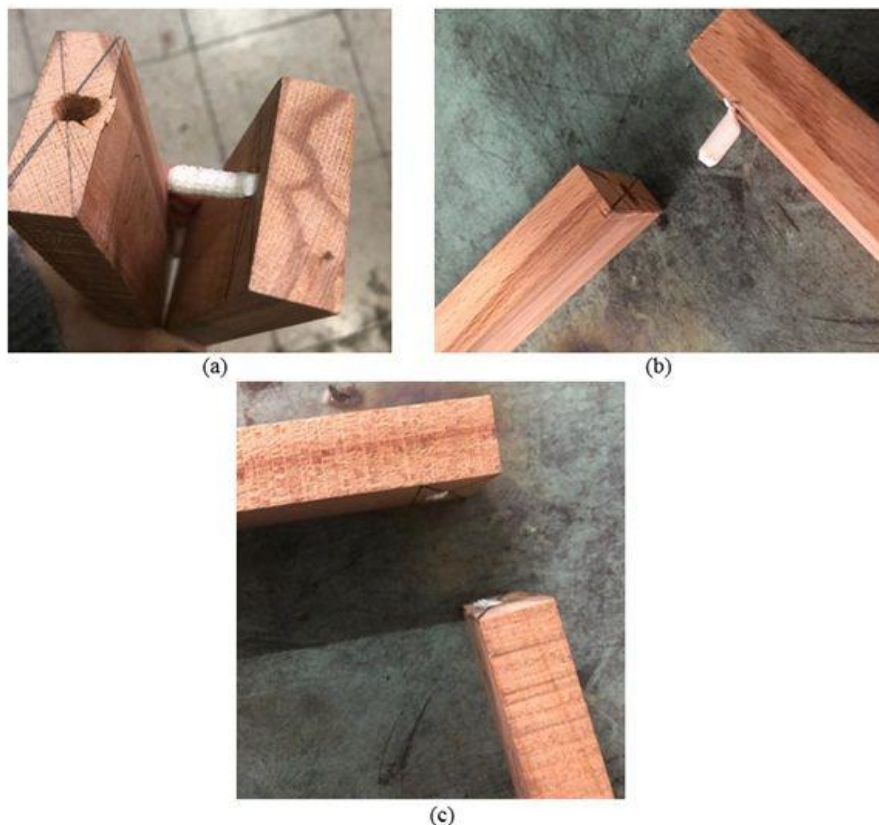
a) The failure mode of grooved (Dome) PLA dowel joint, b) The failure mode of straight PLA dowel joint, c) The failure mode of cross-PLA dowel joint.
